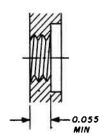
Open type shutter cable socket with straight (American) thread.
